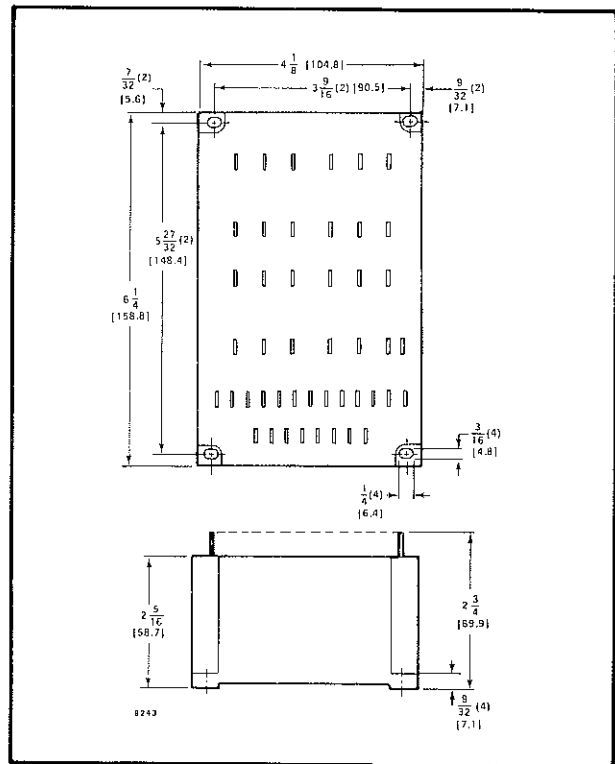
MOUNTING DIMENSIONS FOR W973 IN in. [mm IN BRACKETS].
